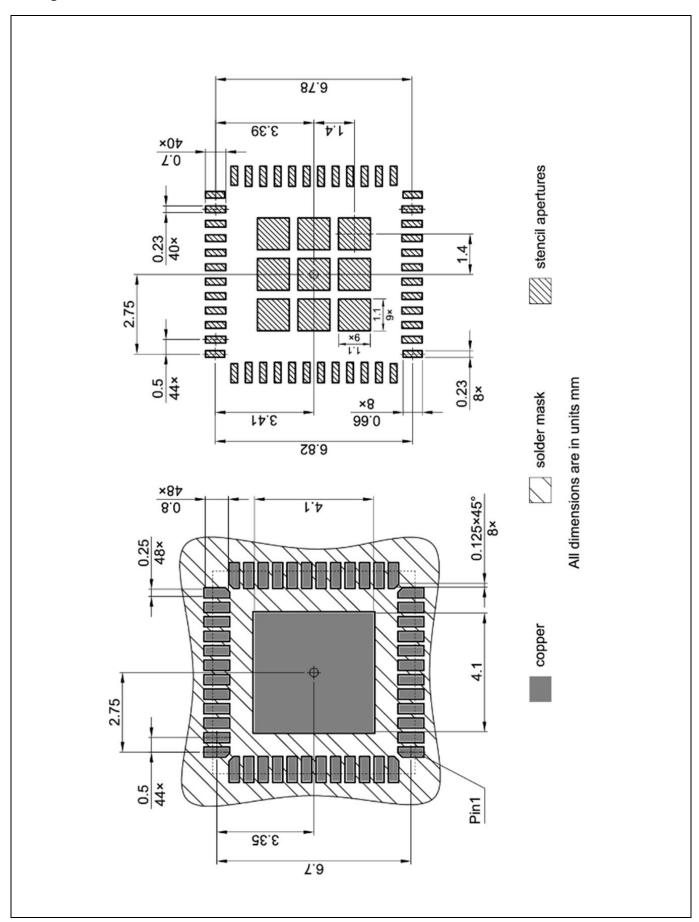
PG-VQFN-48-78 PCB footprint dimensions
